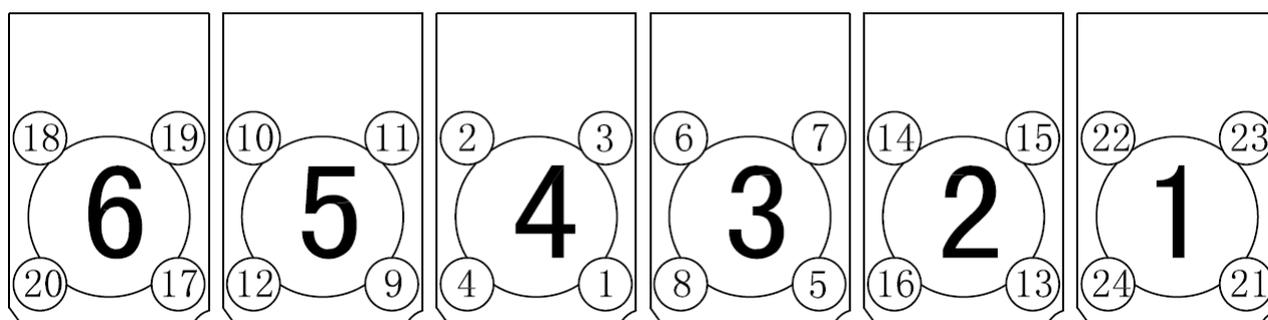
Tightening order of cylinder head main bolt and auxiliary nuts
